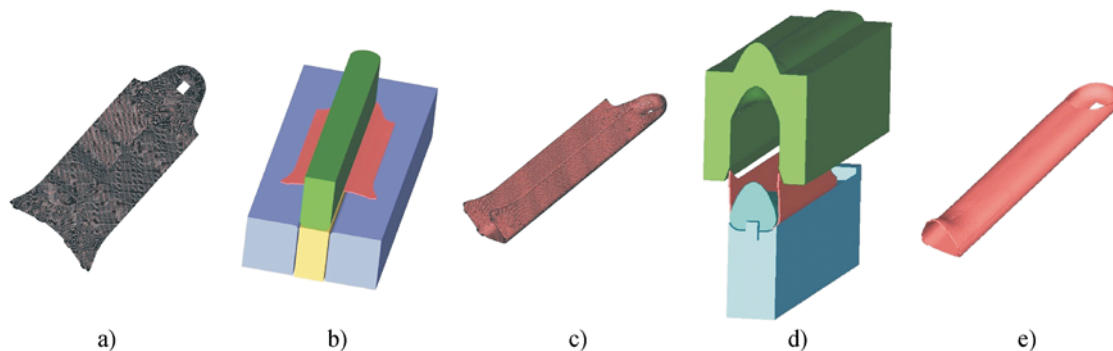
Numerical models: a) FE mesh of blank b) tool assembly for 1st stage c) FE mesh of preform d) tool assembly for 2nd stage e) virtual handle
